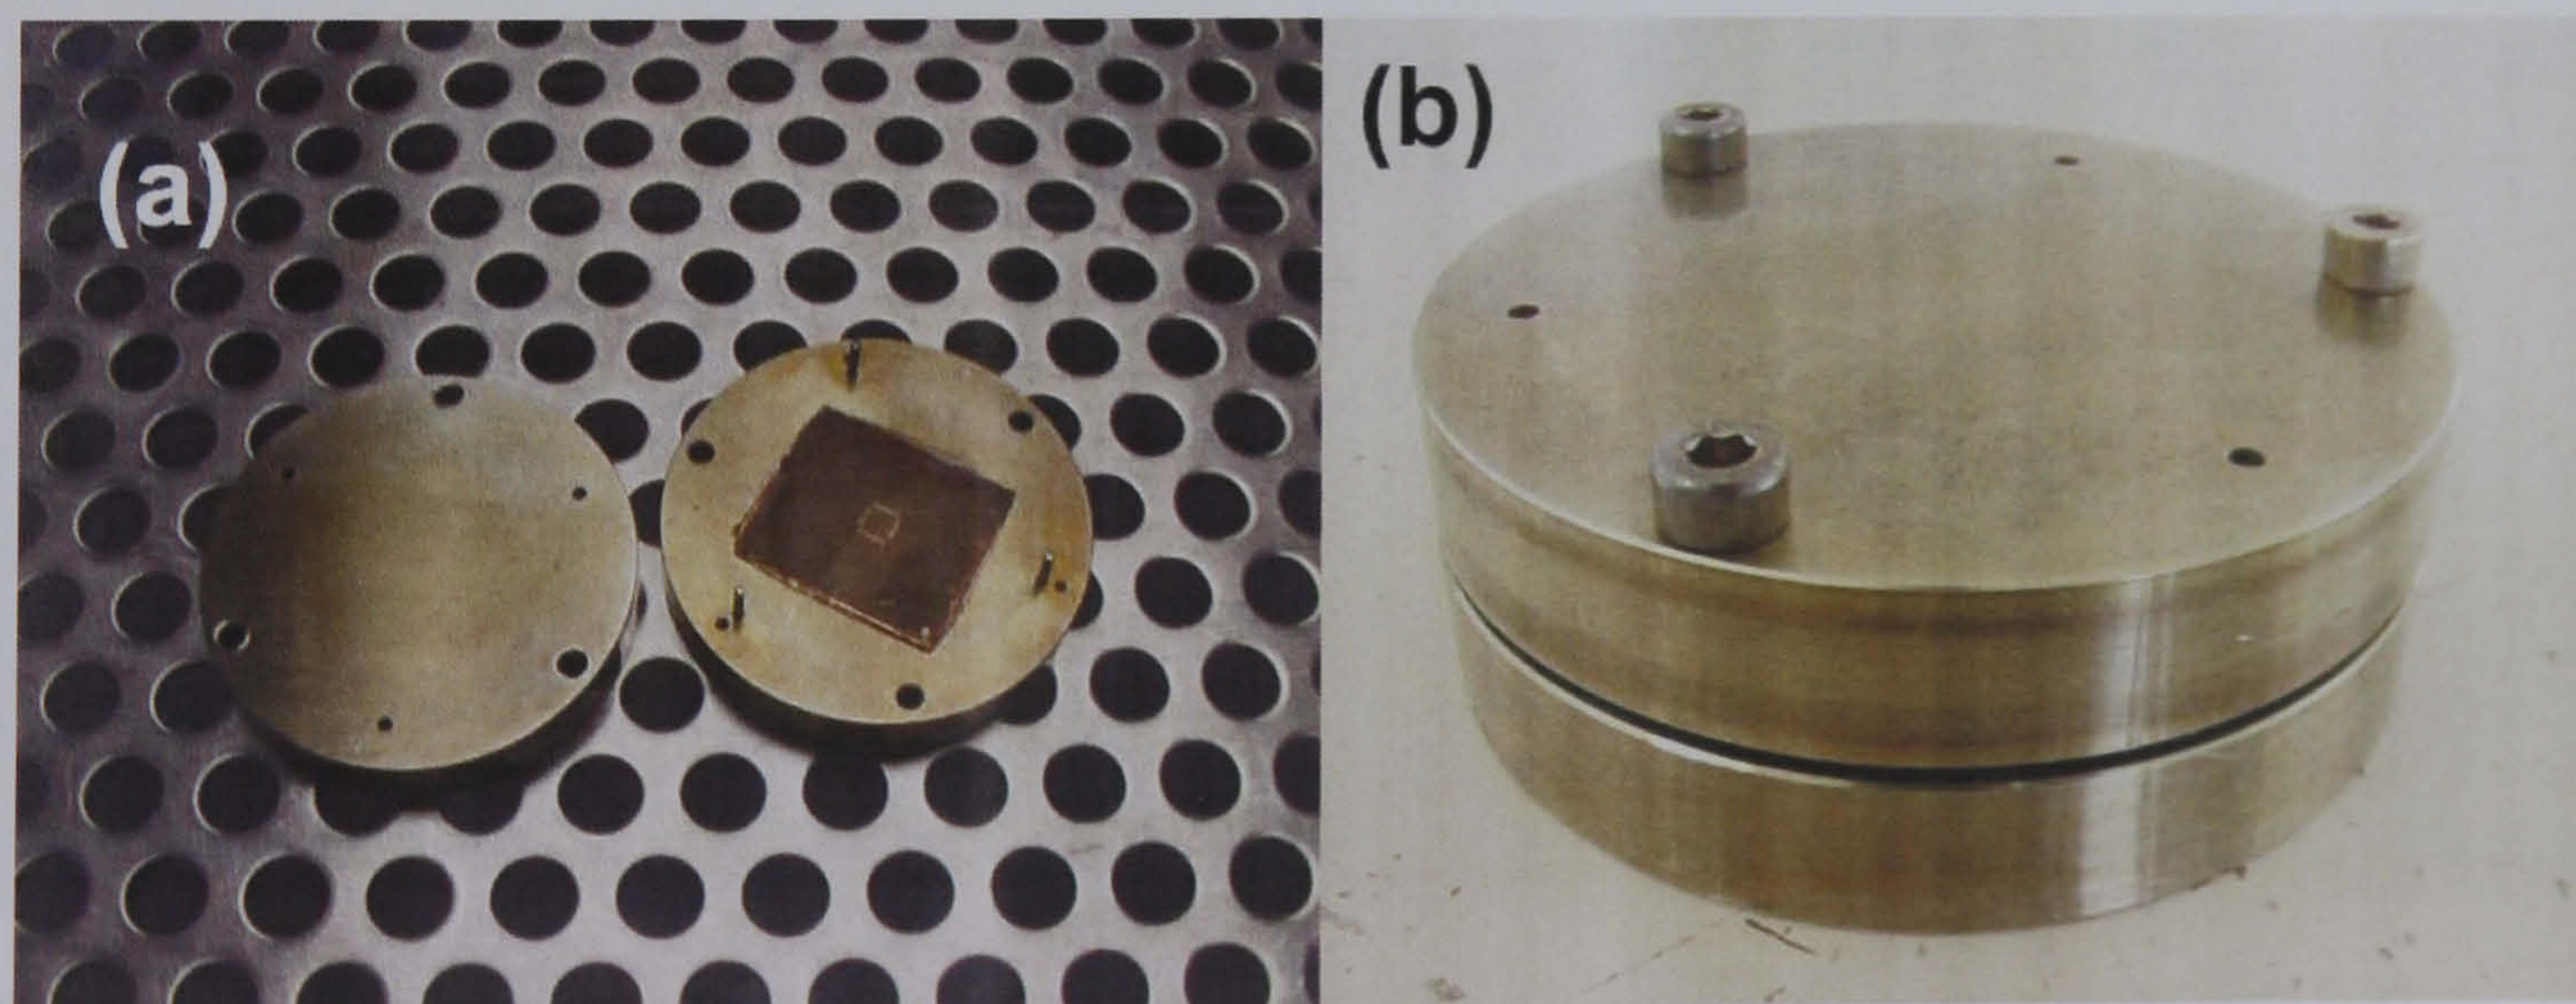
The vice used to mould PDMS. (a) Vice in parts (b) Vice assembled
